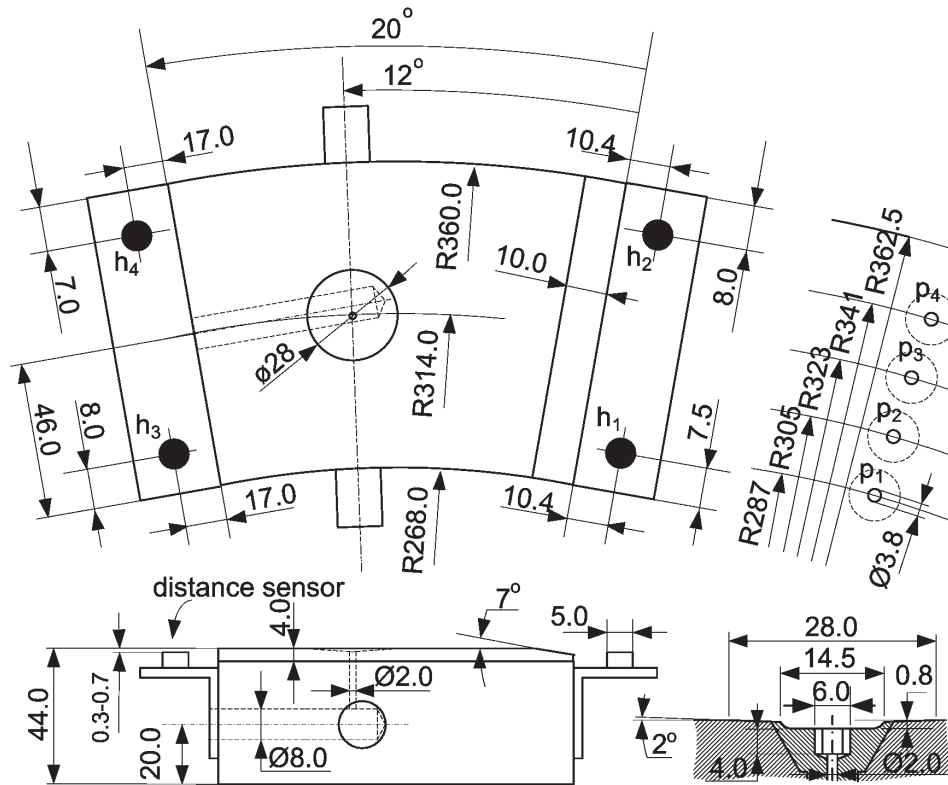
Left: The position of sensors and the dimensions of the pad with an injection pocket are shown. all edges have a 1 mm chamfer. Top right: Positions of the pressure sensors in the collar. They are positioned approximately 0.1 mm below the surface. Bottom Right: Cross section of the injection pocket. A brass insert provides the injection piping.
